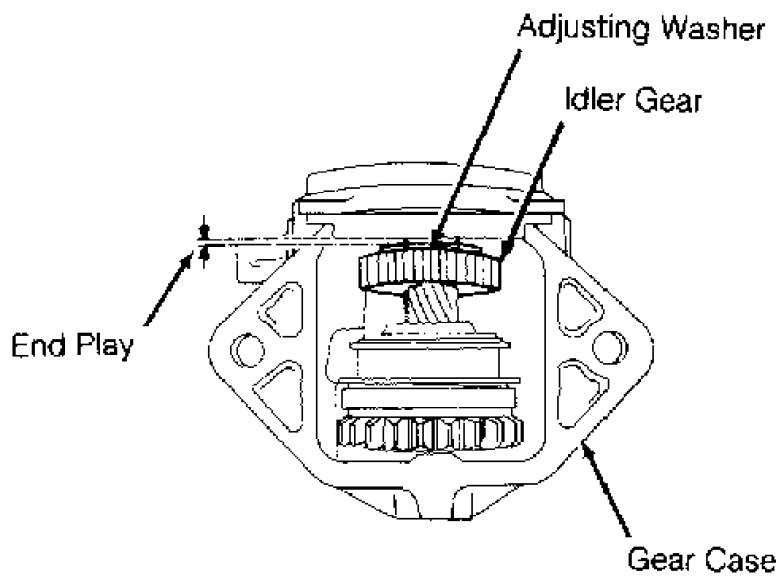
Checking Pinion End Play (M30 With Mitsubishi Starter)
